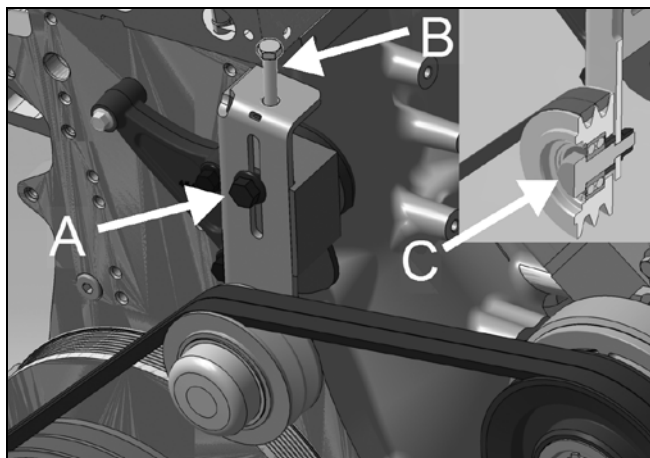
TENSIONER ON STANDARD BELT ARRANGEMENT
